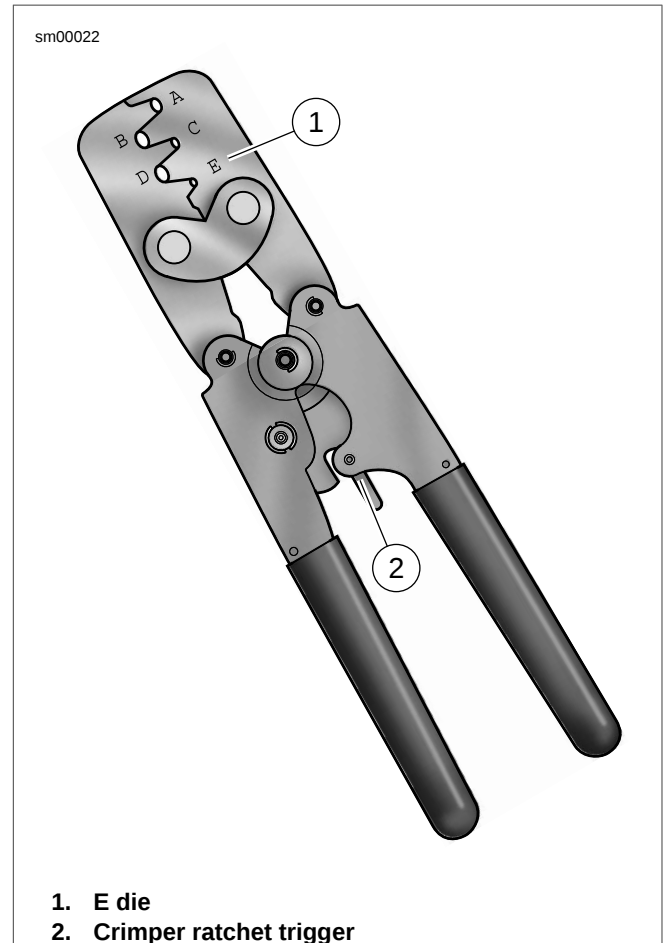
Packard Terminal Crimper (HD-38125-7)
